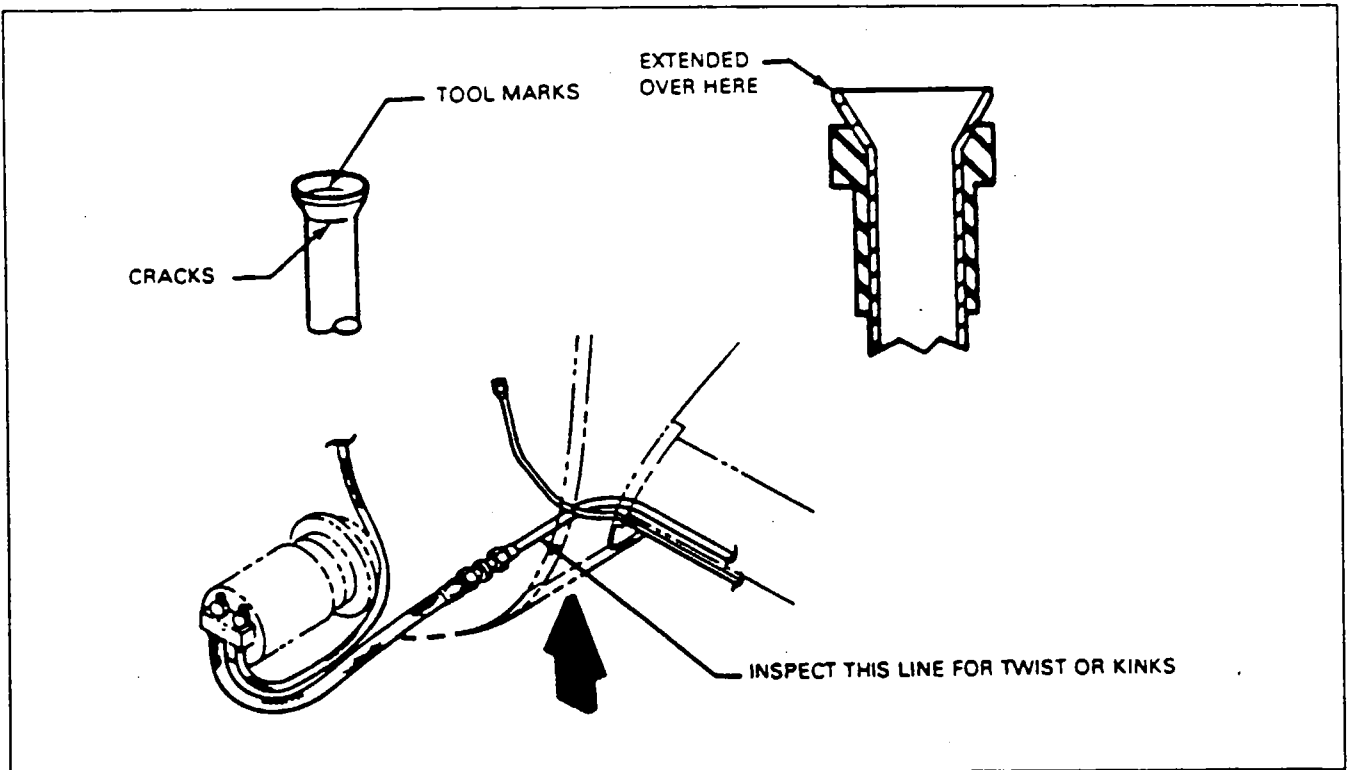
Inspection Points (Air Conditioning System) (Typical)
